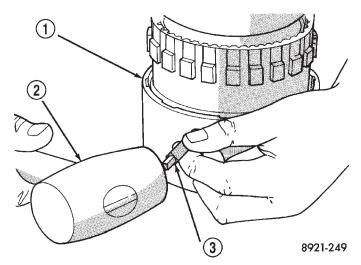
Marking Direct Clutch Drum And Annulus Gear For Assembly Alignment
